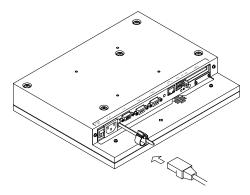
Attaching the AC cable removal prevention clamps < 2/4 >
